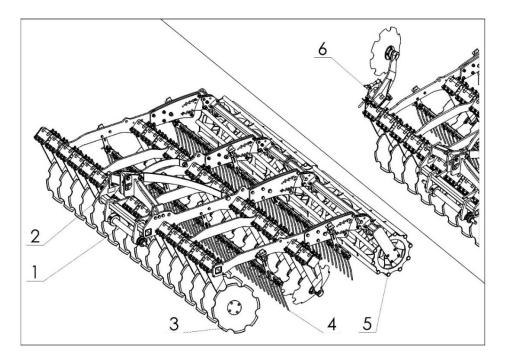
Cultivating and sowing unit: 1- beams of bottom rods, 2- unit frame, 3- disc blade, 4- scraper bar, 5- re-compaction roller, 6- foldable support of the edge disc (versions 3.5m and 3m)
